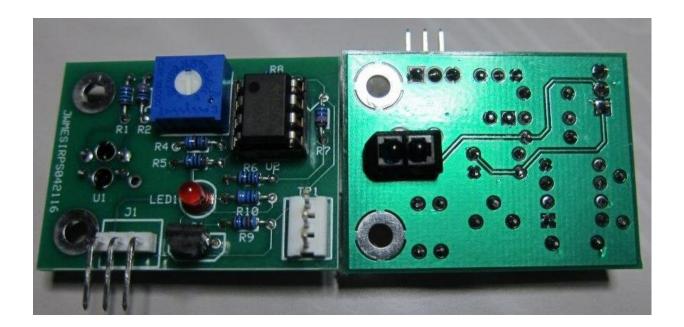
represents the silk screen (top) layer of the Reflective Photosensor Circuit Module's printed circuit board (PCB). This silk screen layer clearly indicates the location of each component.
